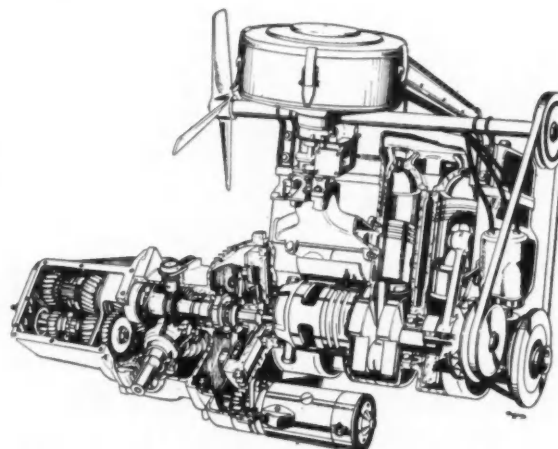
Three-cylinder, two-stroke engine has a displacement of 748 cc. Crankshaft is mounted in four radial-type ball bearings.
